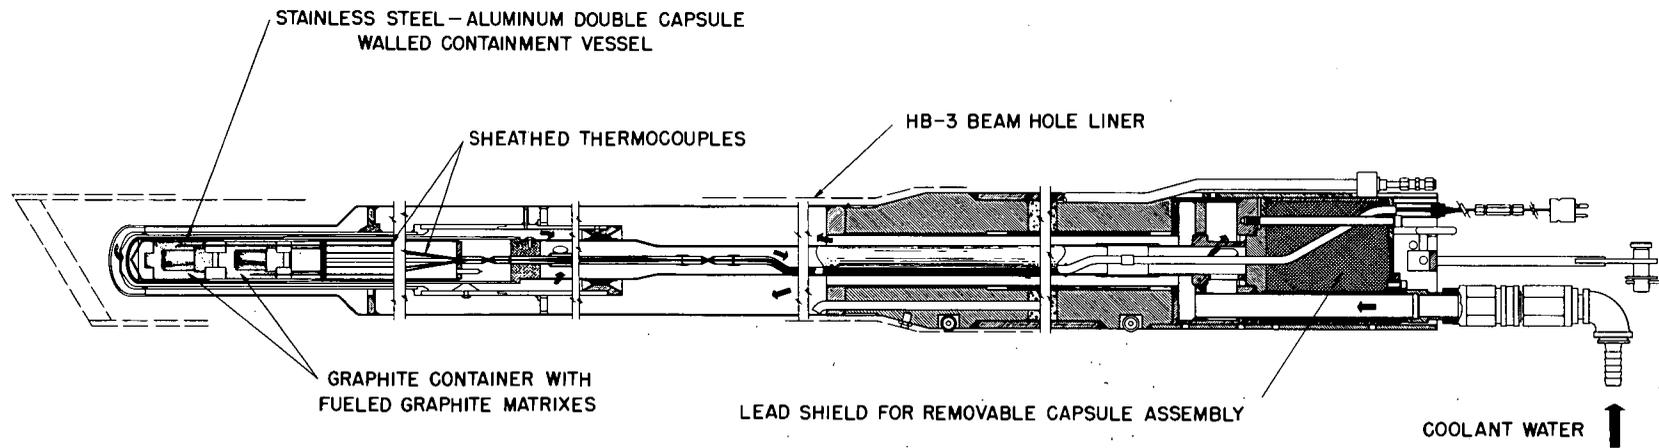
ORNL-MTR-48 Capsule and Plug Assembly for Advanced GCR Fuel-Element Irradiation Tests.
